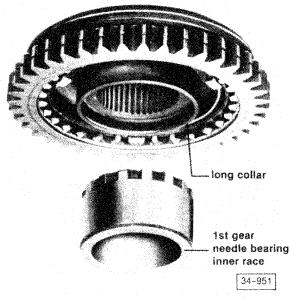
Synchronizer assembly 1st/2nd gear and 1st gear needle bearing inner race, installation position
